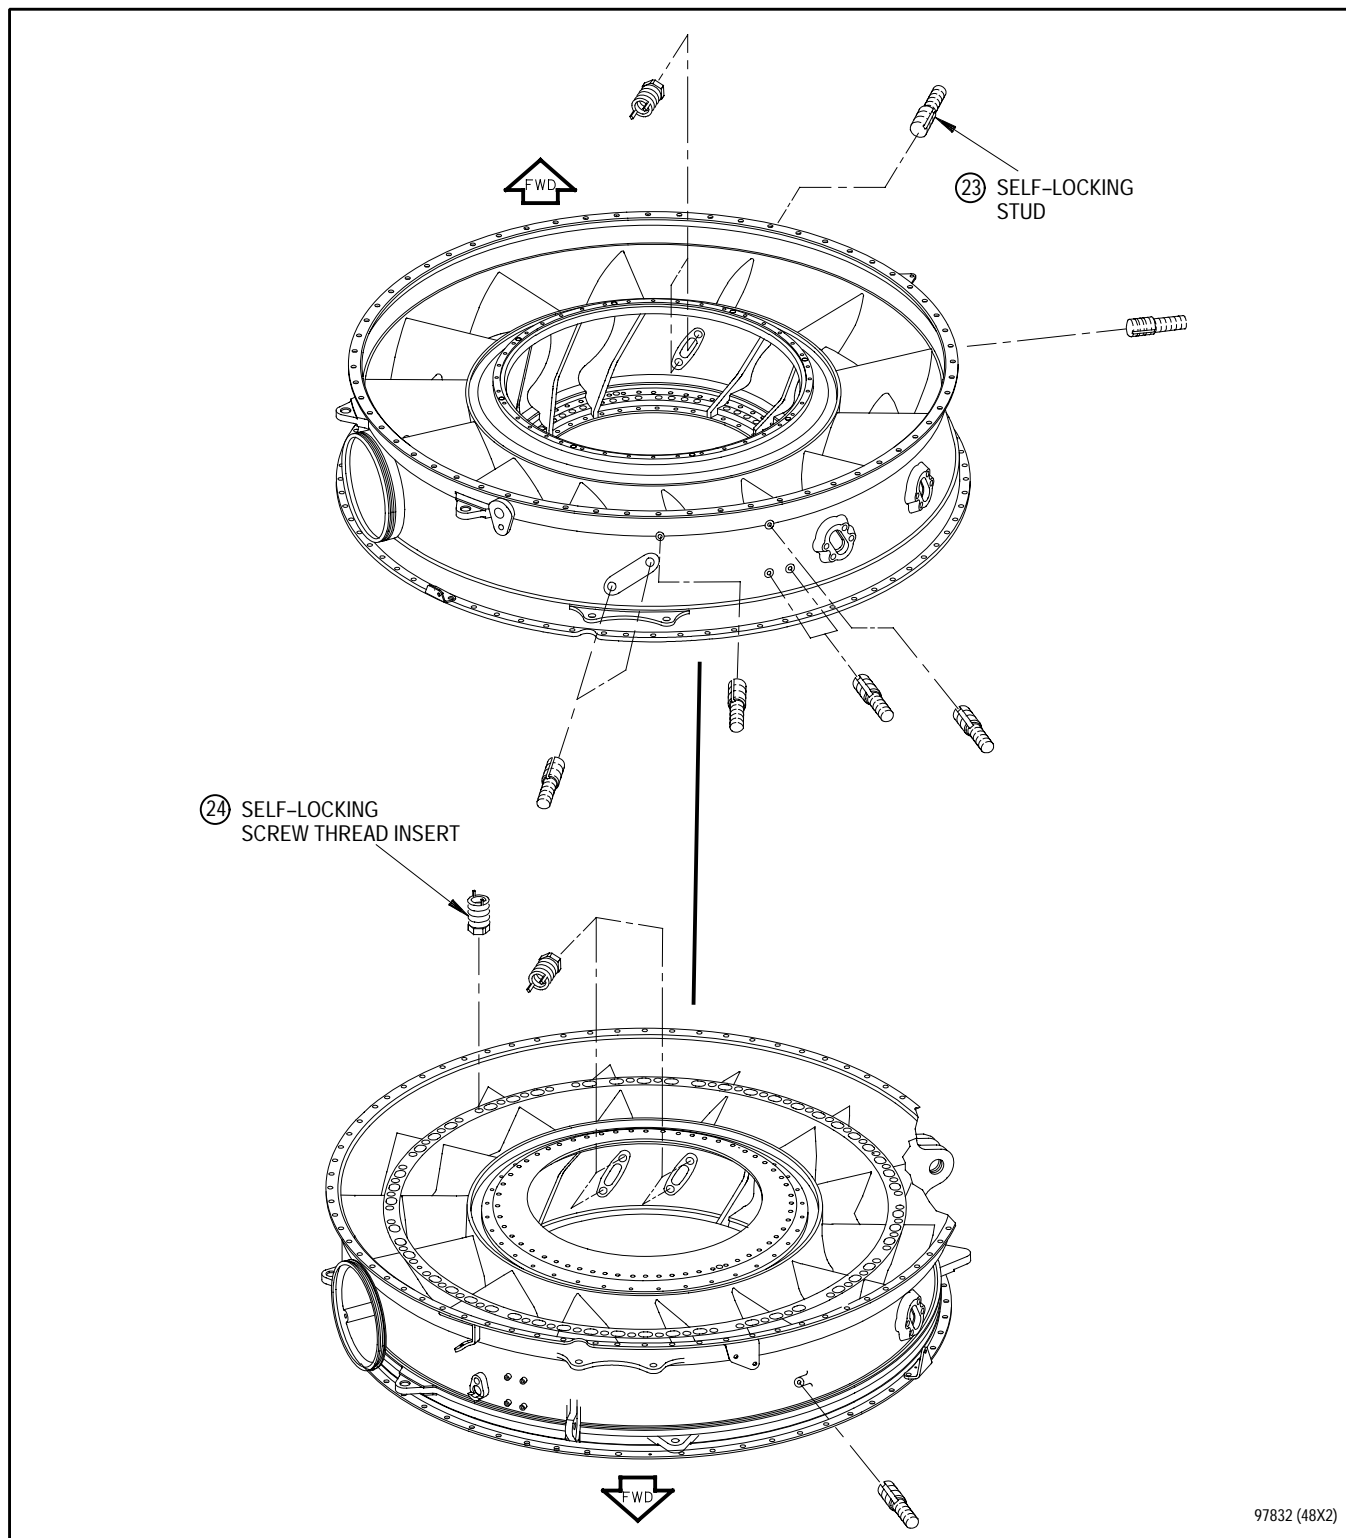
Compressor Intermediate Case Assembly - Inspection (Sheet 3 of 3)
